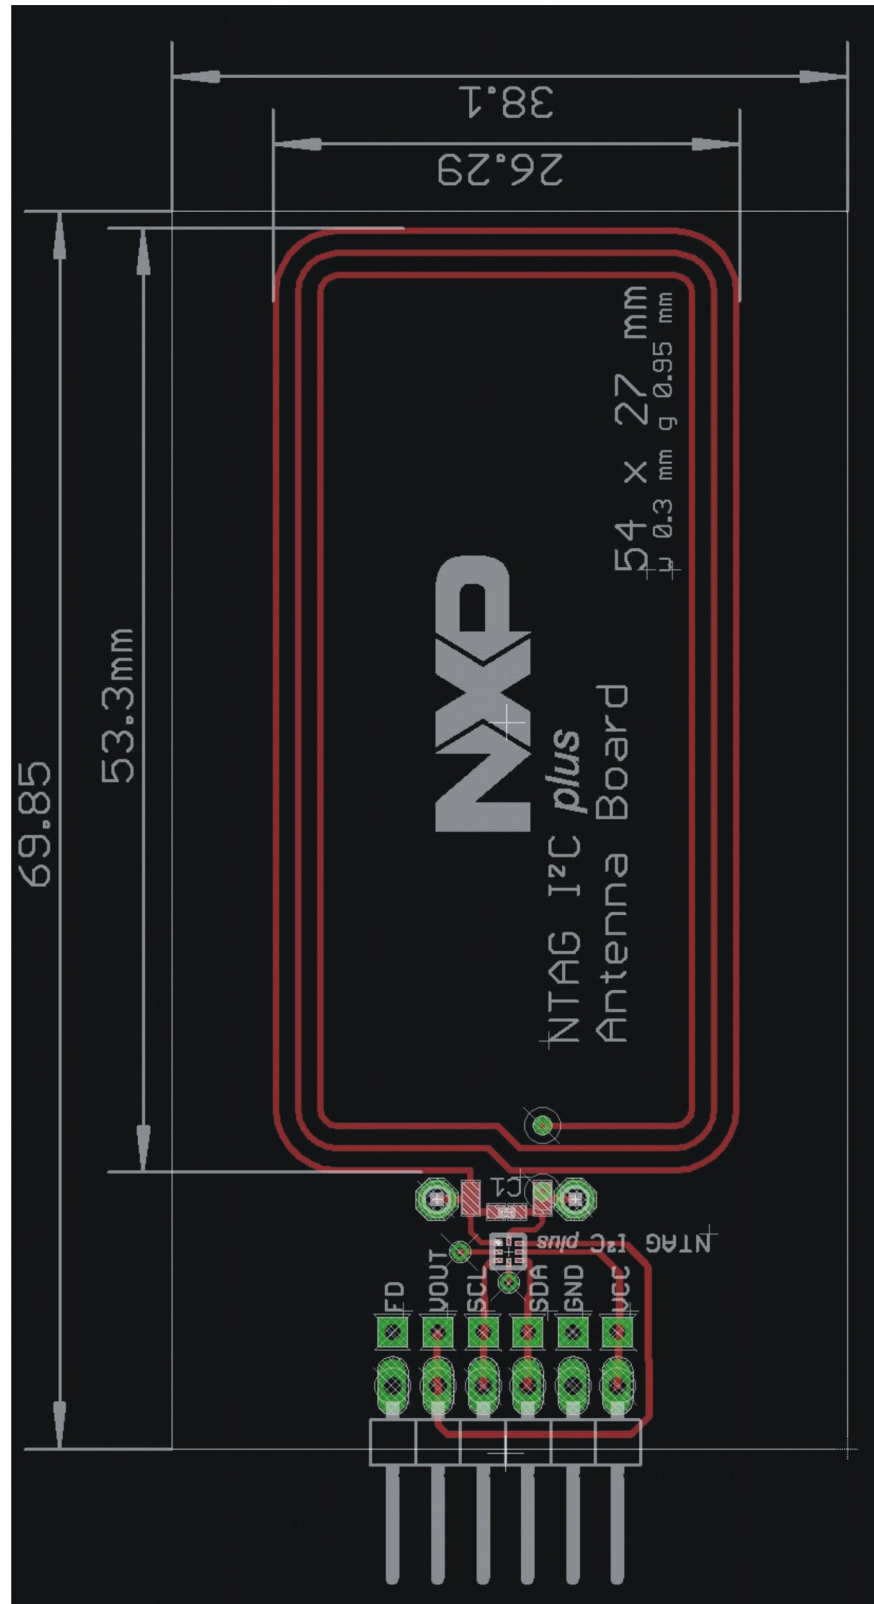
NTAG I²C plus Antenna Board OM5569/NT322E, 54 x 27mm, Rev. 2.0: dimensions and equipped pcb with connector.
